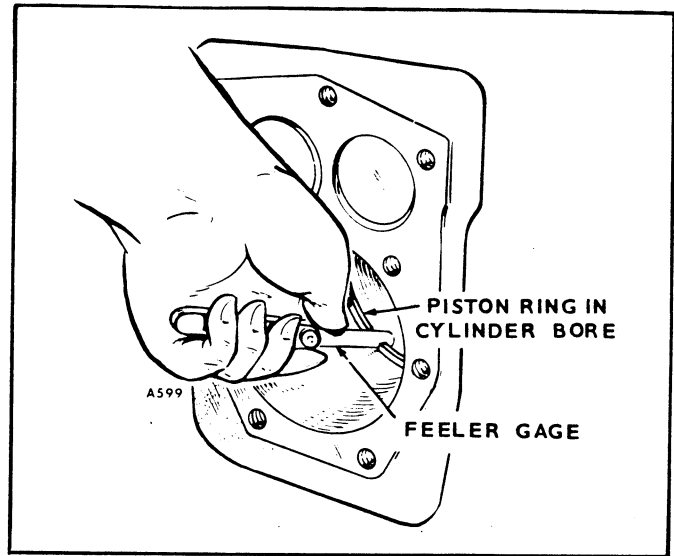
FITTING PISTON RINGS TO TYPICAL CYLINDER
